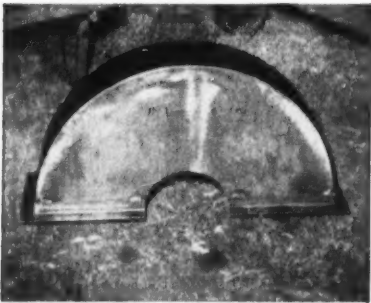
Steel designed gear case cover now used weighs only 10 pounds... costs half as much to produce. Fabricated entirely in the manufacturer's own shop by arc welding.
